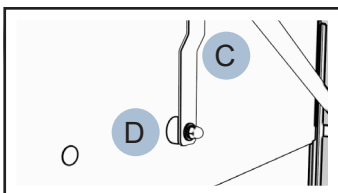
Door Linkage Arm (C) Removal & White Roller (D)
